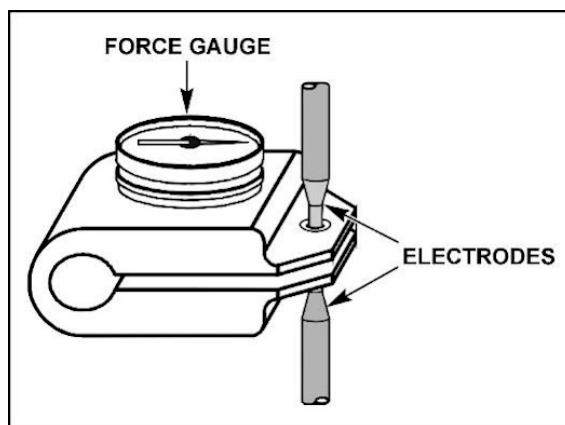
Measuring Preset Firing Force of the Weld Head with a Force Gauge
